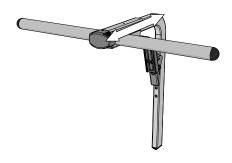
The knee pads are removed in the following figures for better visual orientation, you do not need to remove the pads.
